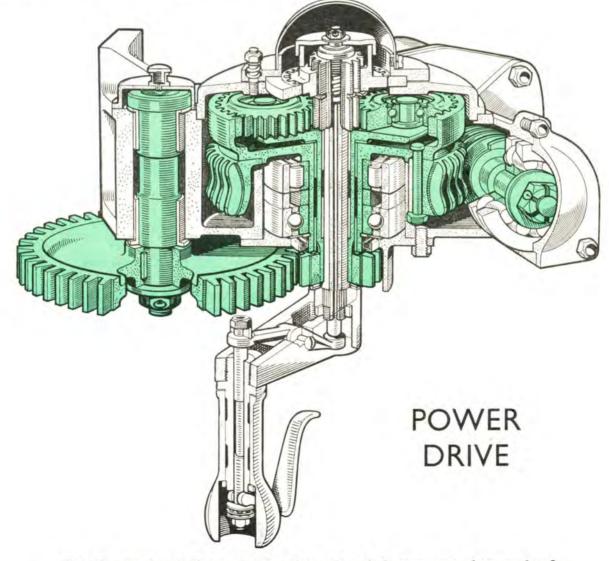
Sectioned View of Gear Box. Tinted Components show path of Power Drive.
